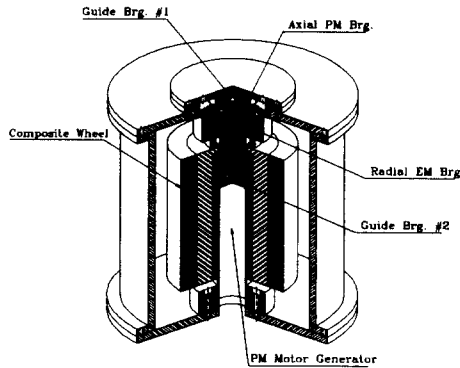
Schematic Drawing of a 500Wh Flywheel Energy Storage Device
